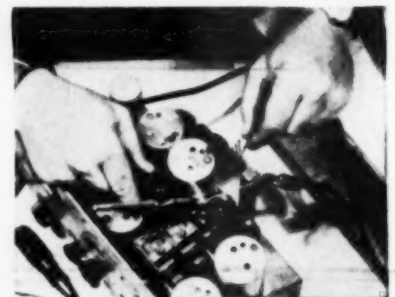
Using the resistance welding technique in soldering two component parts.
